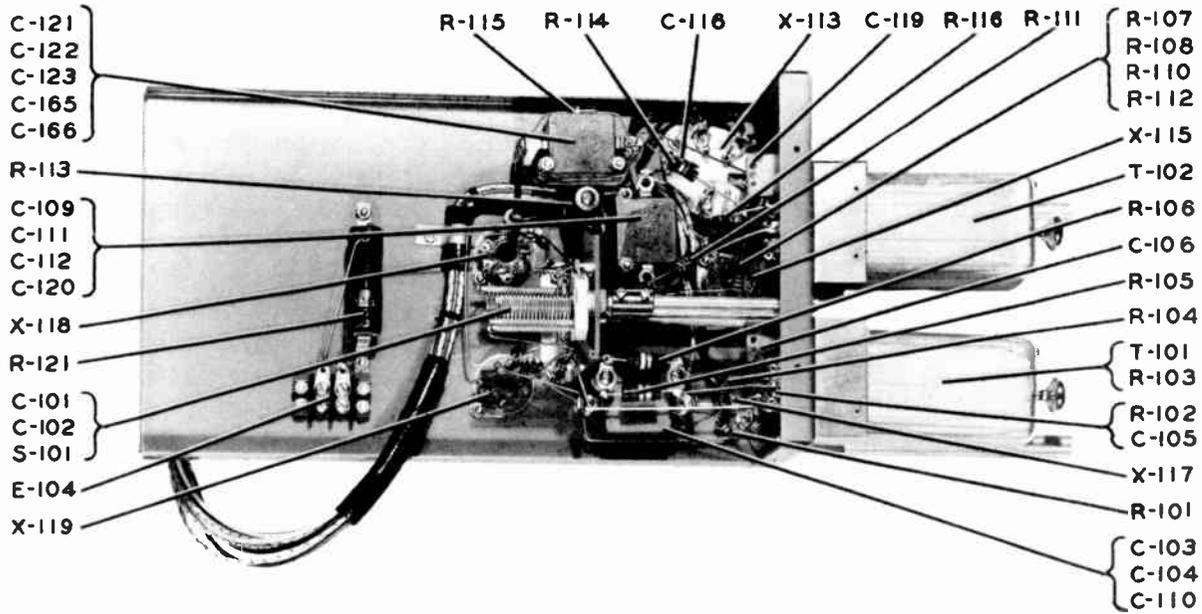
Driver Cabinet RF Chassis, Bottom View.
